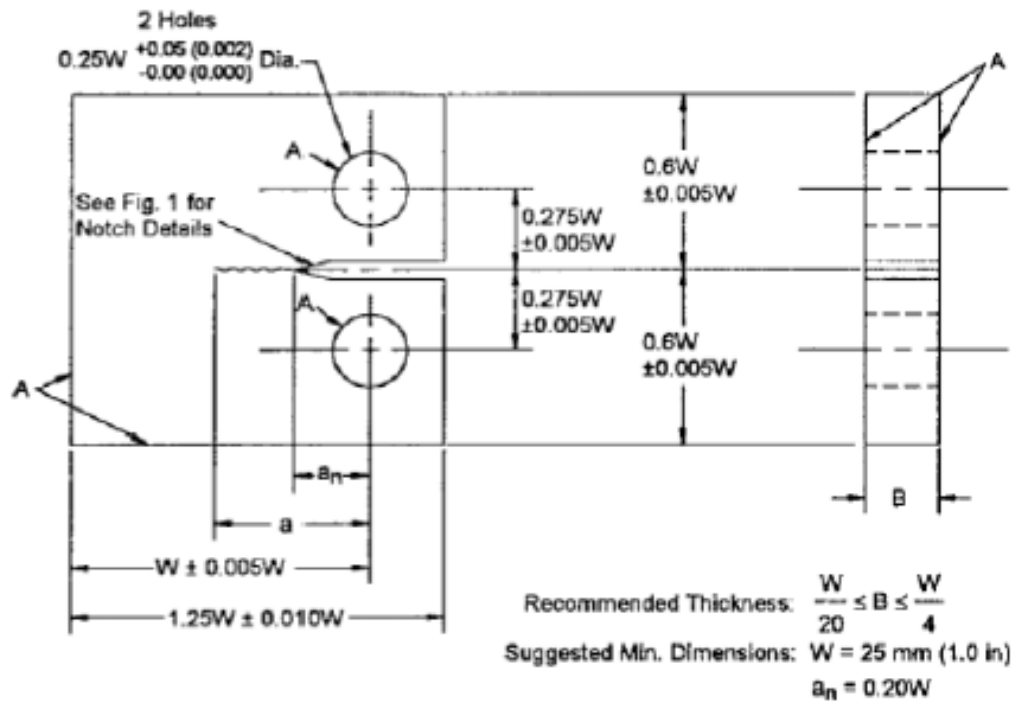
An example of a standard Compact-Tension (CT) specimen with dimensions indicated for FCG Testing as specified in ASTM E647 (41).
